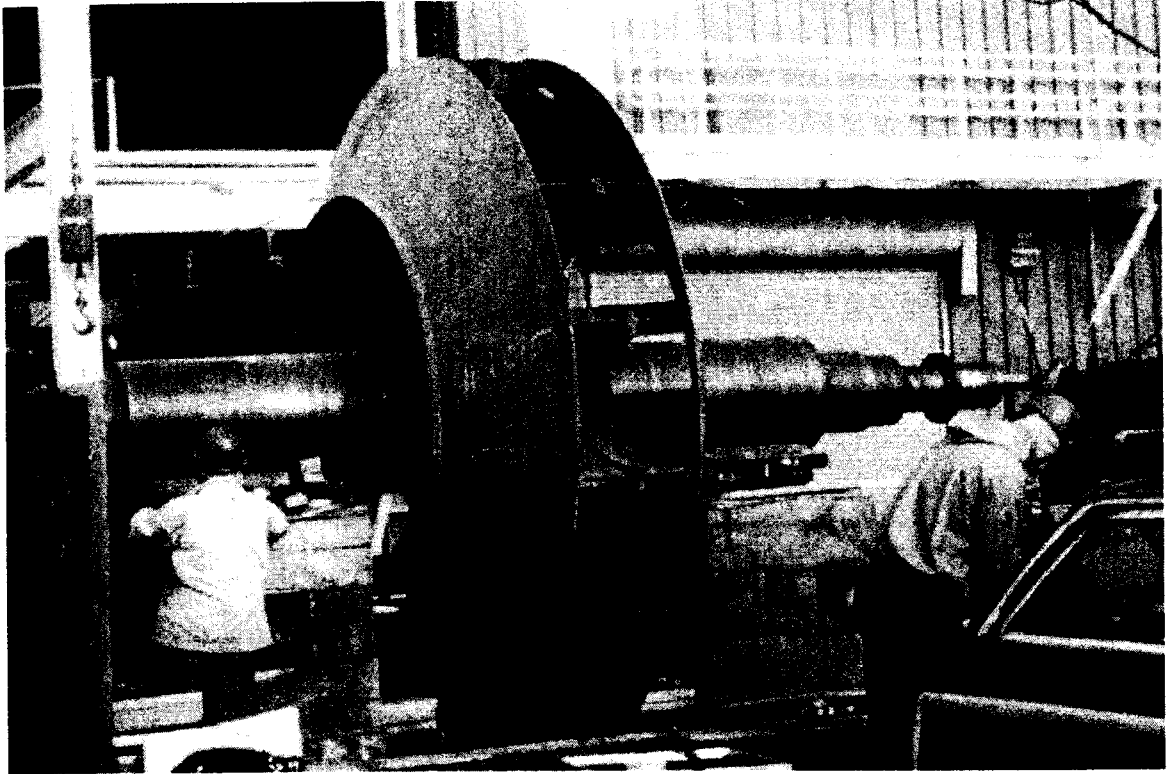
Shaft and impeller assembly used in industrial fans
